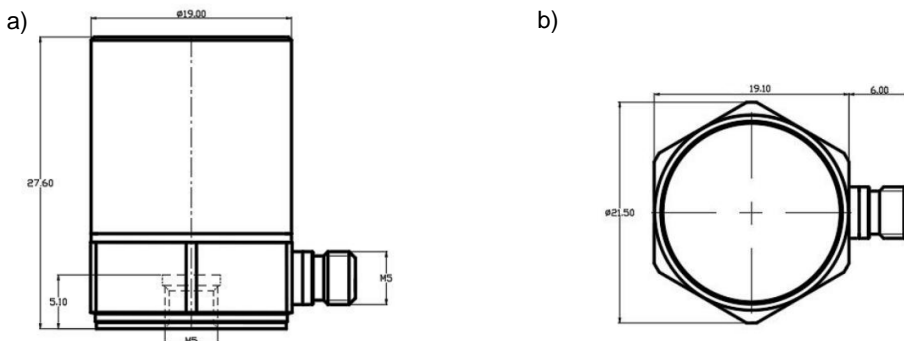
Mechanical dimension SSA-P8UCA6 a) side view b) top view
